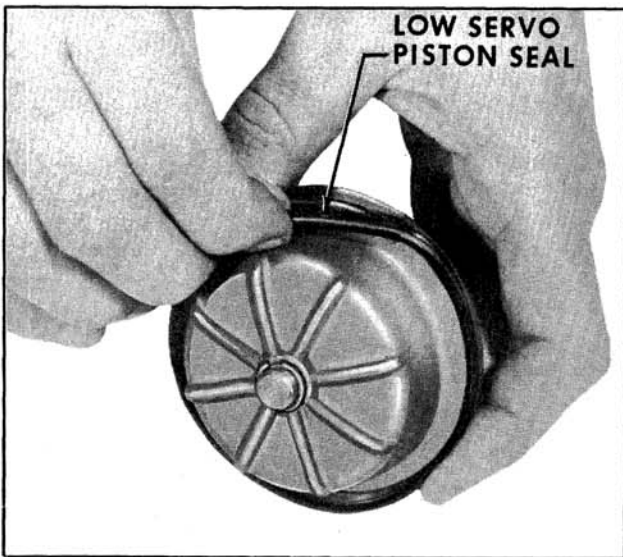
Removing and Installing Low Servo Piston Seal
